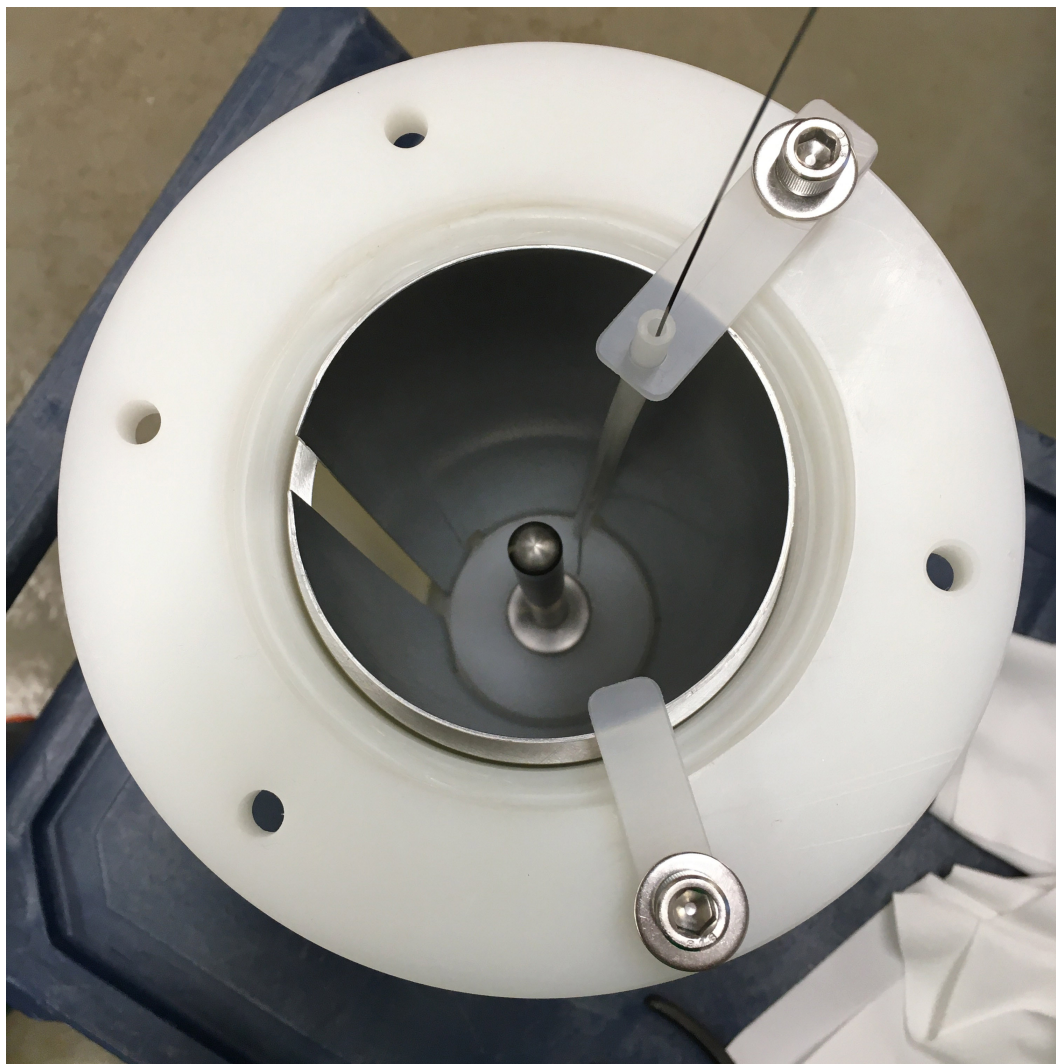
A niobium inner conductor sample for the DC Field Dependence Cavity mounted in the custom fixture for chemical etching.
